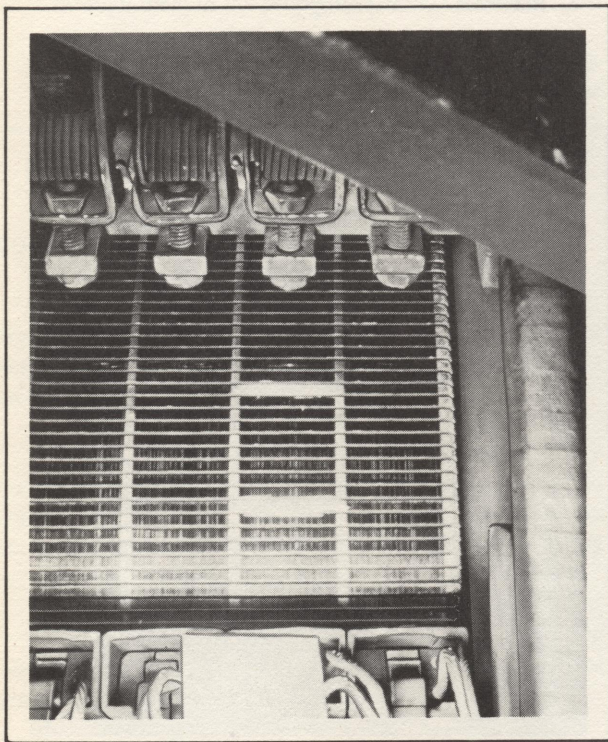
COMMUTATOR FILM REMOVED WITH A PENCIL ERASER TO SHOW A SMOOTH COPPER SURFACE UNDERNEATH.
